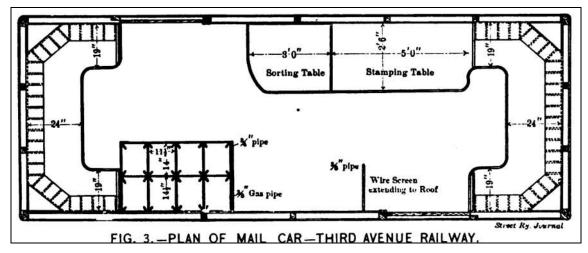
Internal layout of a New York mail car used from 1895 to 1900 (Street Railway Journal, November 1895, p 698).
